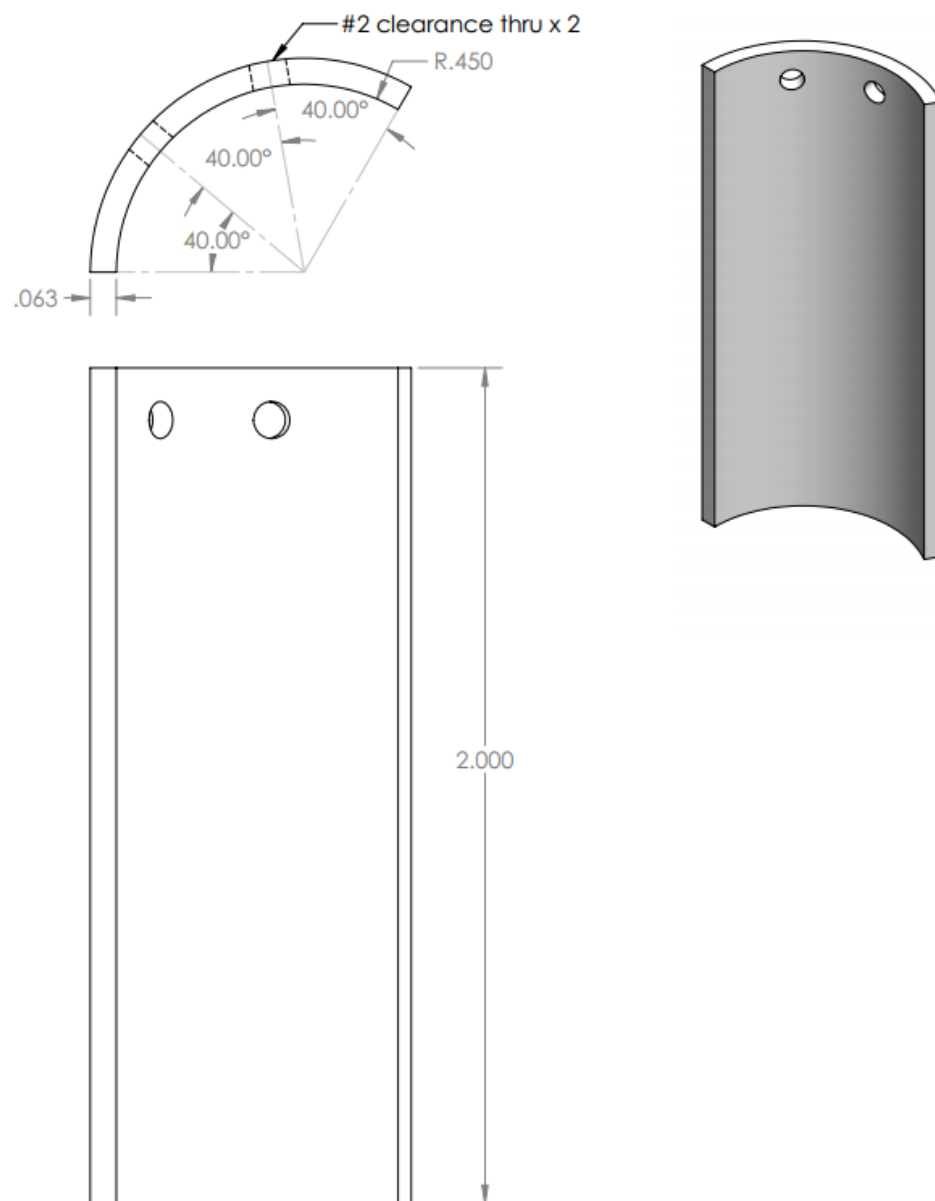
Top and bottom pieces of the mixing chamber insert.
